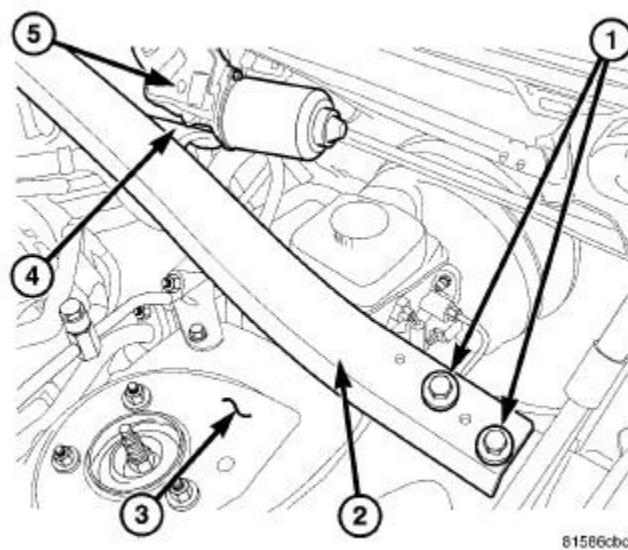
Bolts, Strut Support, Driver Side Strut Tower, Bracket & Wiper Motor
